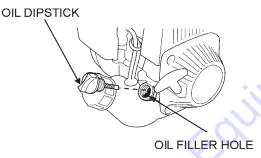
Engine Oil Dipstick/Oil Filler Hole
